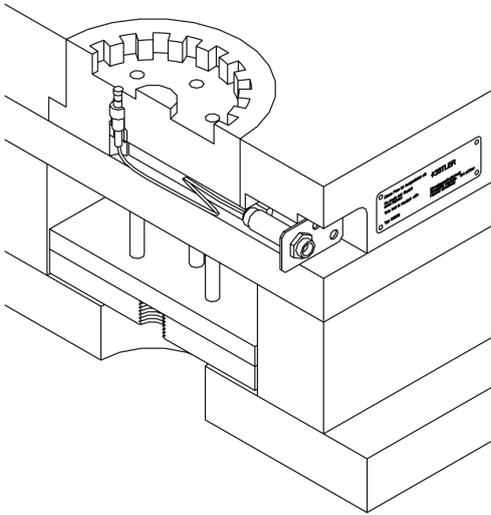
Sensor, cable, connector, mounting plate and identification plate
